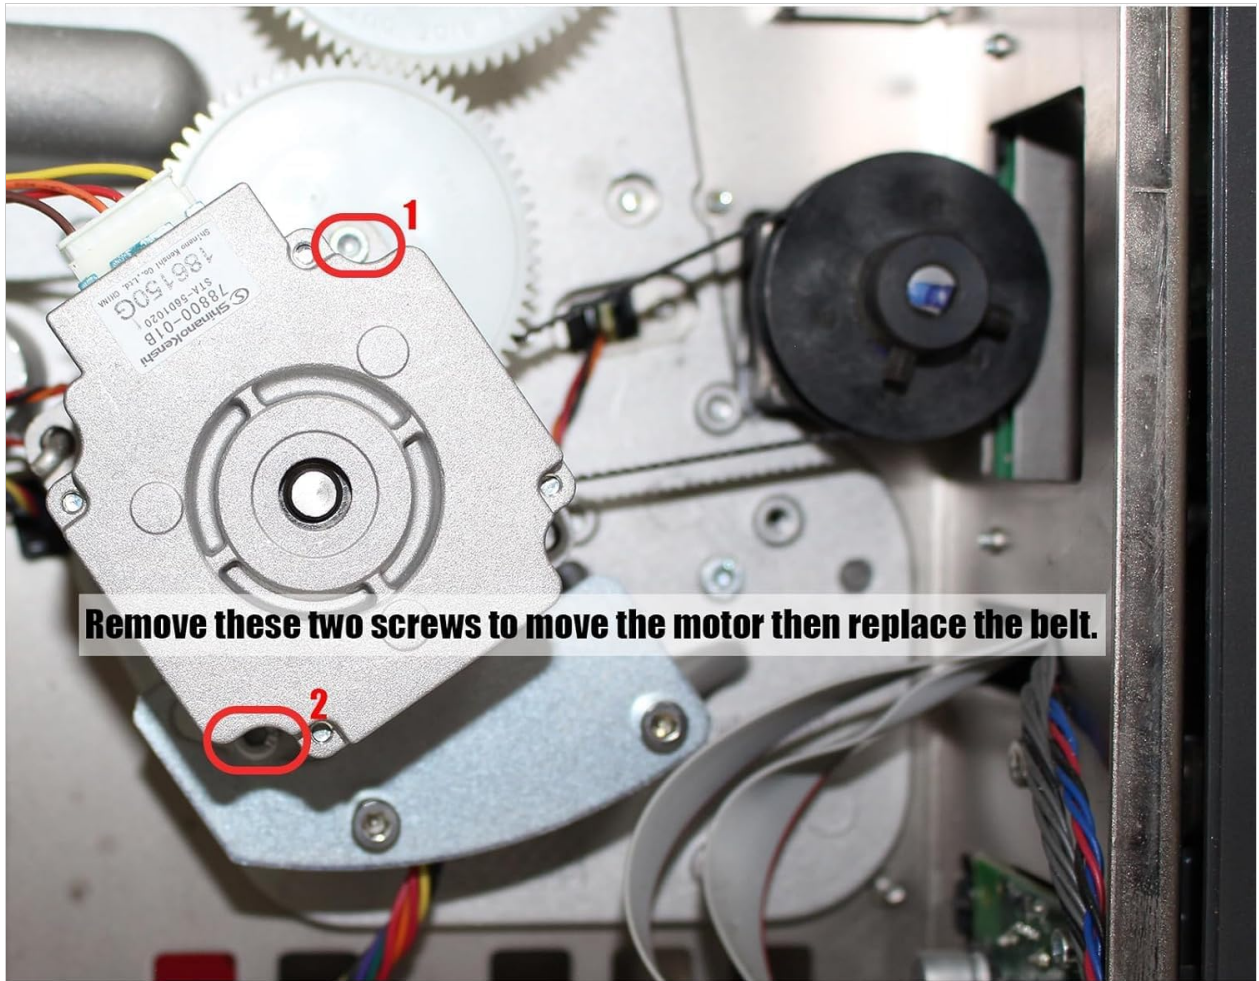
View of the printer's internal drive mechanism. The two screws (circled in red and labeled 1 and 2) that need to be removed to adjust the motor position are highlighted. Removing these screws allows the motor to be moved, facilitating belt replacement.
